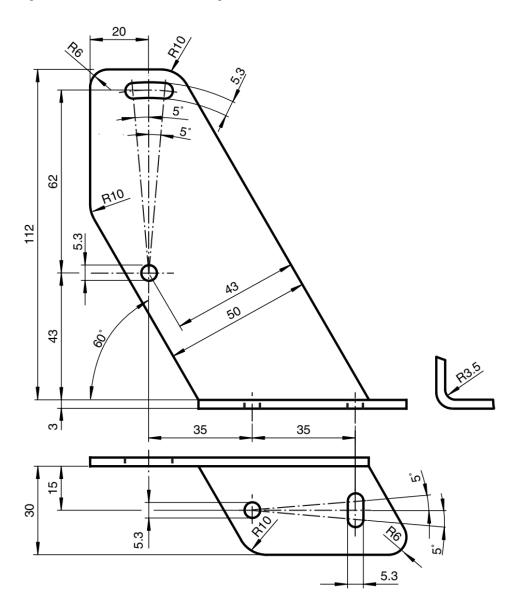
Rigid Laser Mounting Bracket (P/N: RIGID-BRACKET) Dimensions (mm)
